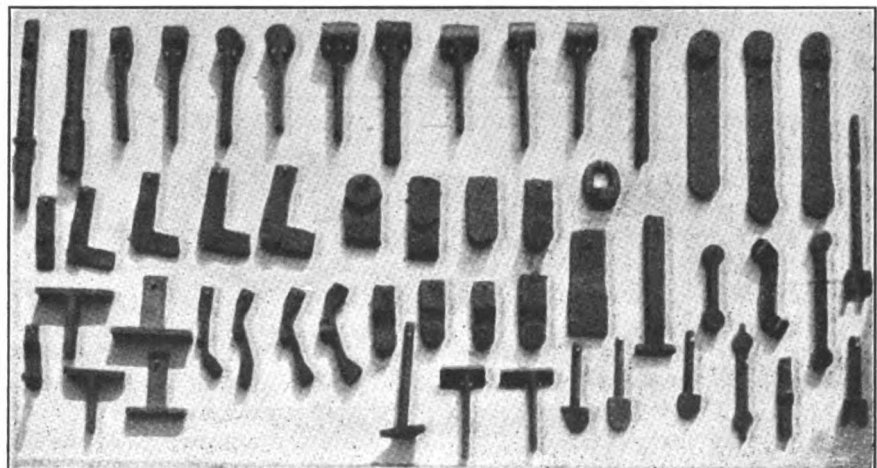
THE FORGING MACHINE MAY SHOW A LOSS IF NOT PROPERLY MANAGED
